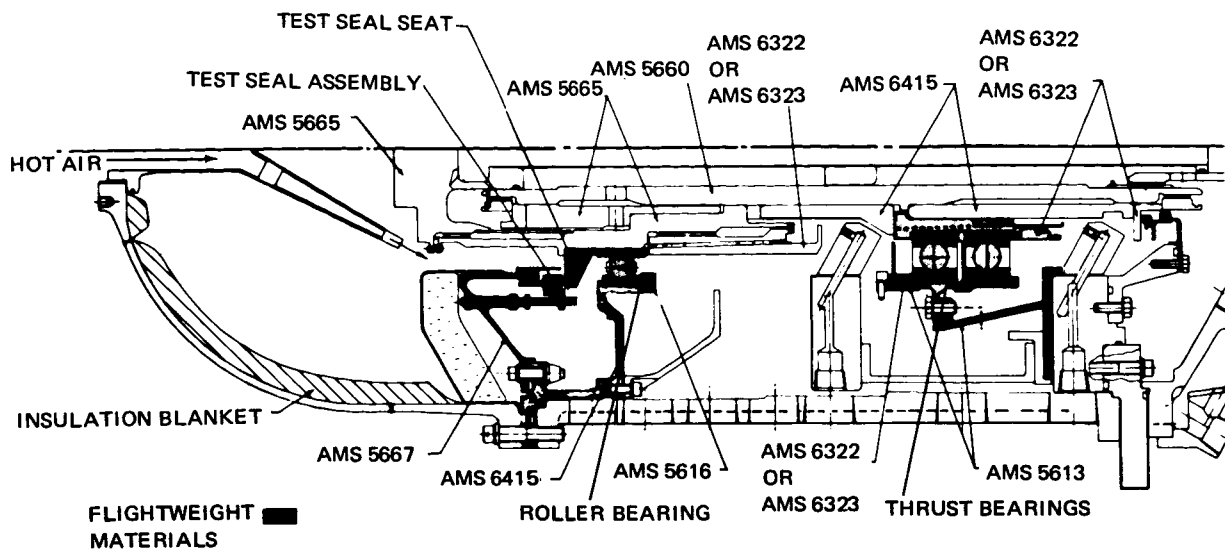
Rig Layout Showing Test Seal Location and Component Materials
